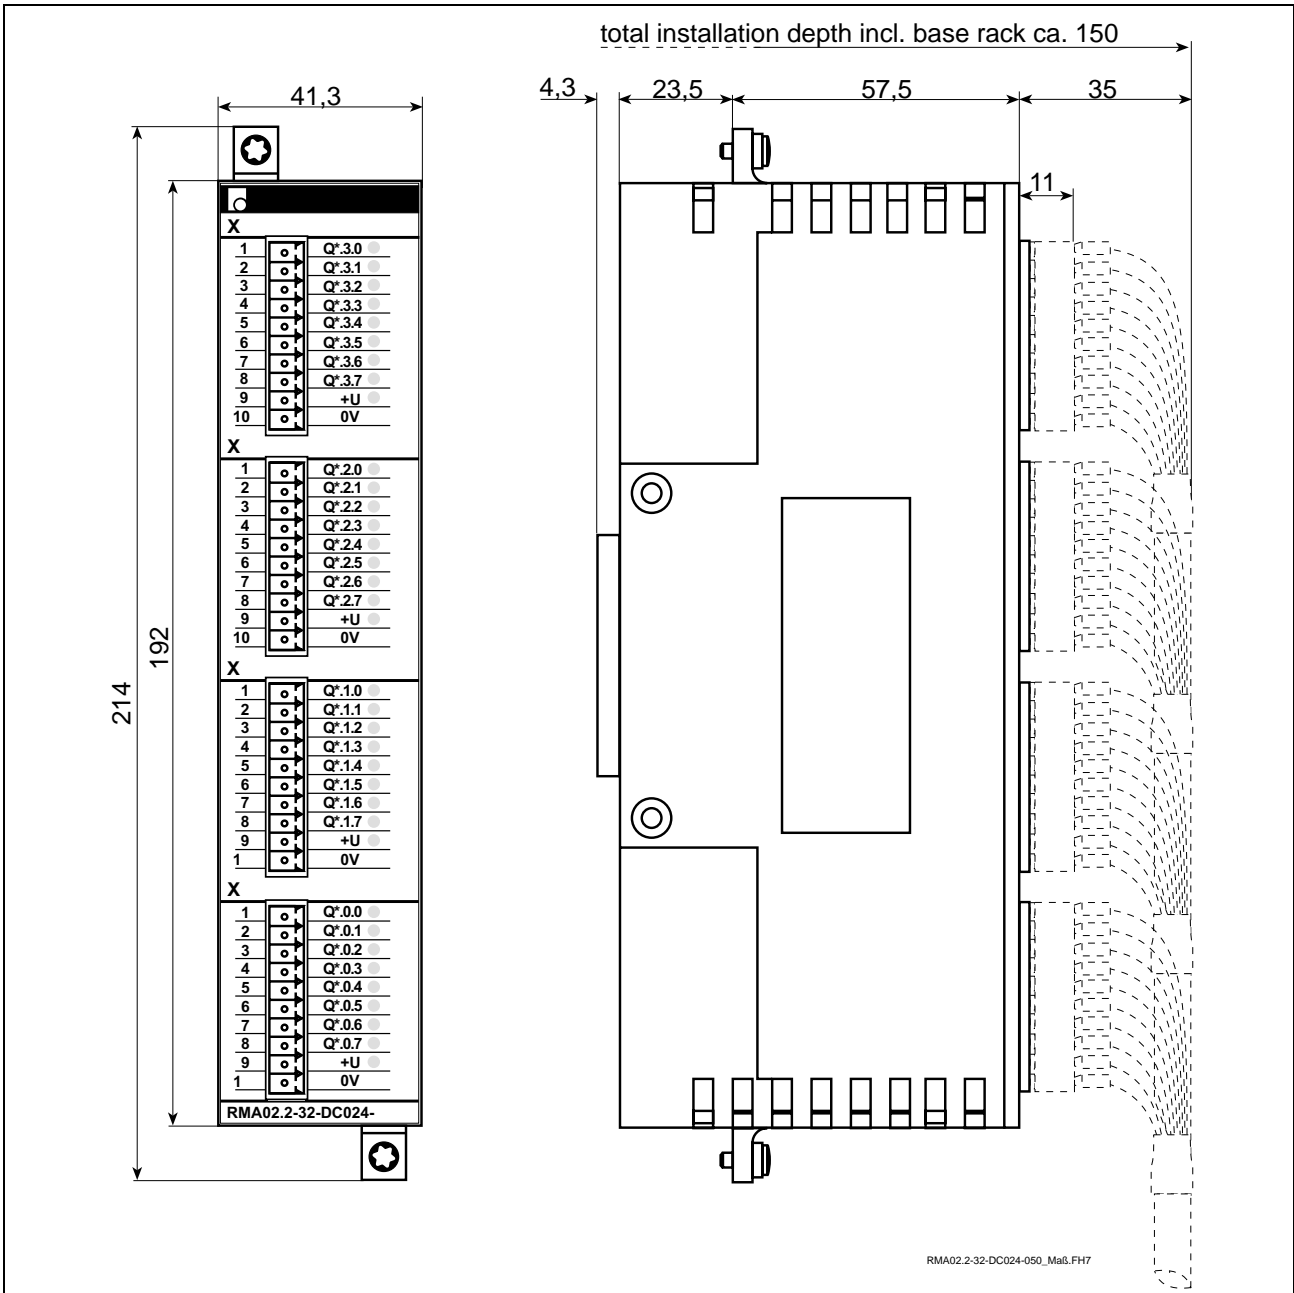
Mounting dimensions RMA02.2-32-DC024-050
